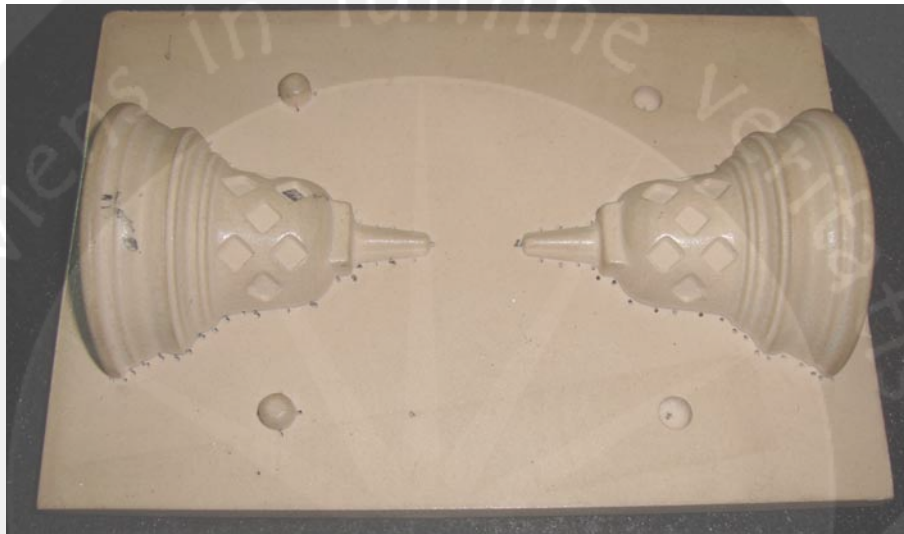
Final Rapid-Prototyped Borobudur Stupa Master Mold
